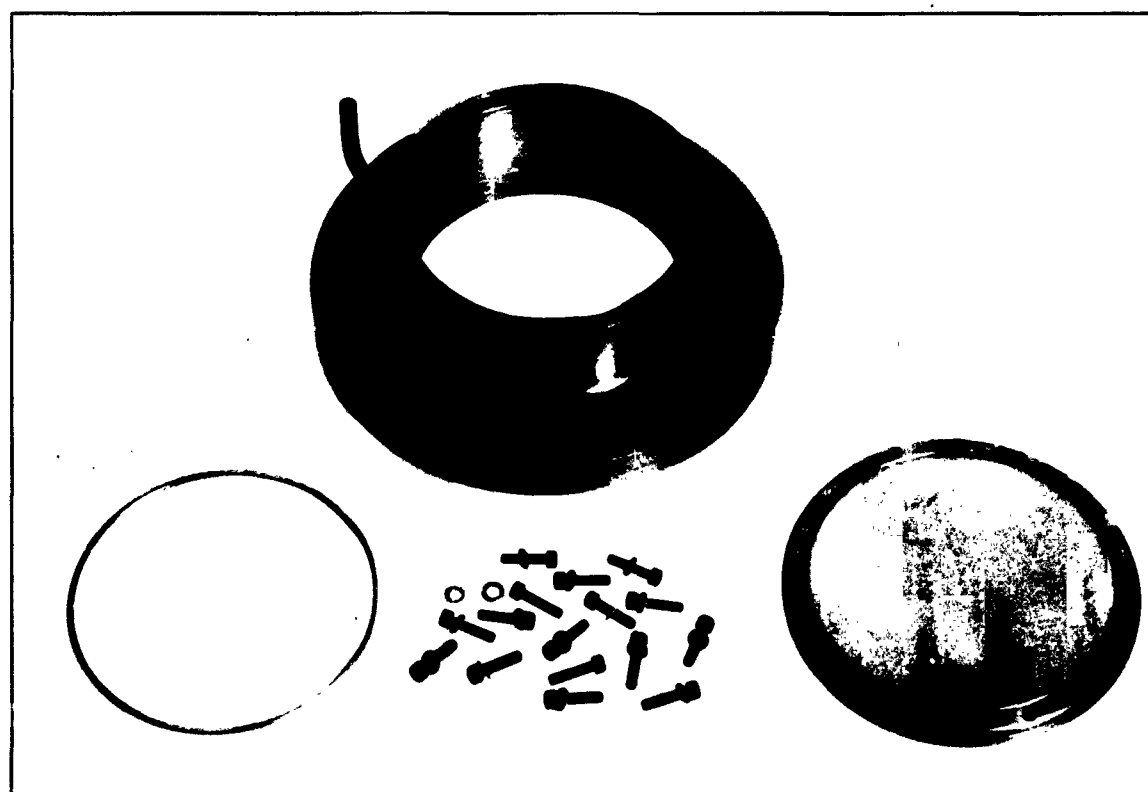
FIG.II. EXPLODED VIEW OF ALUMINIUM GASKET SEAL.
